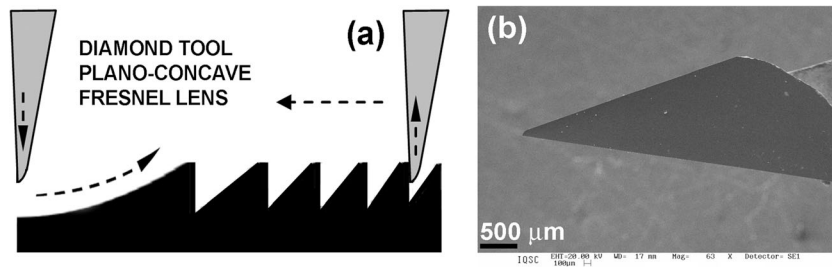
a Machining strategy applied to the fabrication of the Fr-Lens mold insert. b SEM of the single-point diamond half radius tool used to machine the Fresnel mold cavity (single crystal diamond tool, from
